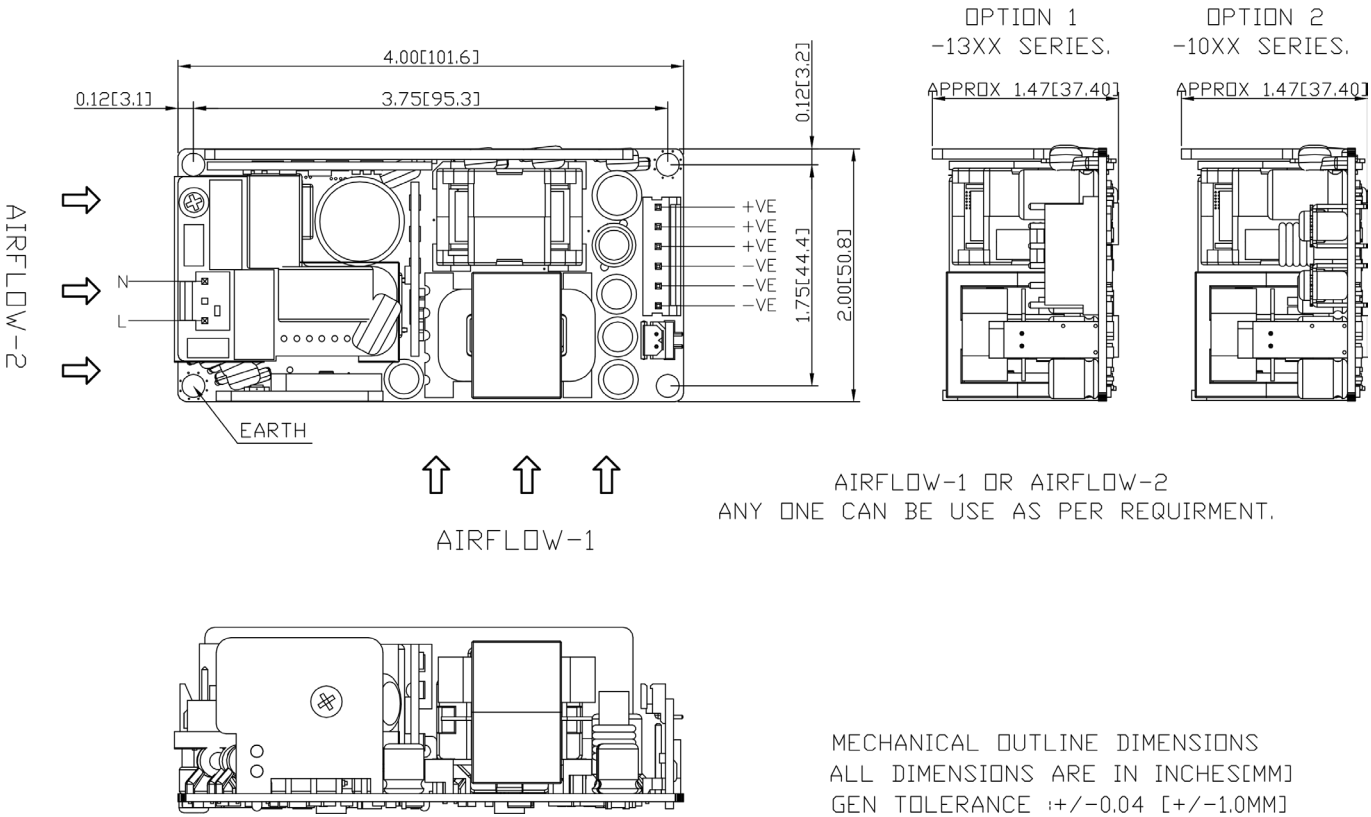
Mechanical Drawing – MEPG300-1XXX models
